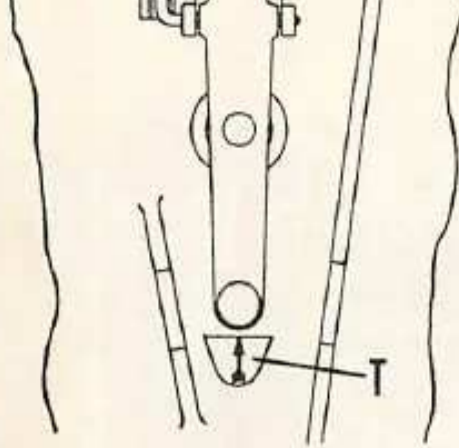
Location of post or boss with stamped arrow for the purpose of setting the fuel inlet valve lever.
